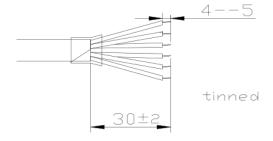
USB-RS485-WE Mechanical Details (dimensions in mm)
